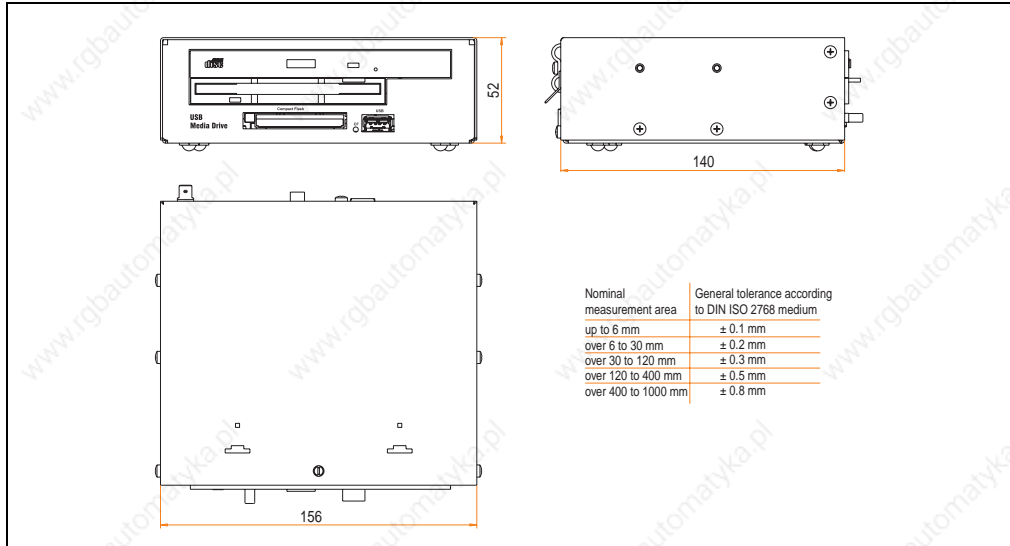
Dimensions - USB Media Drive 5MD900.USB2-00
